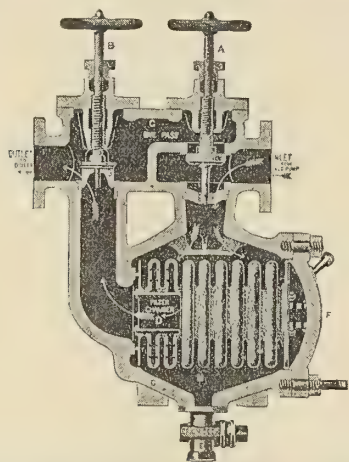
SECTIONAL VIEW OF THE WILLOCK-REID FILTER.
